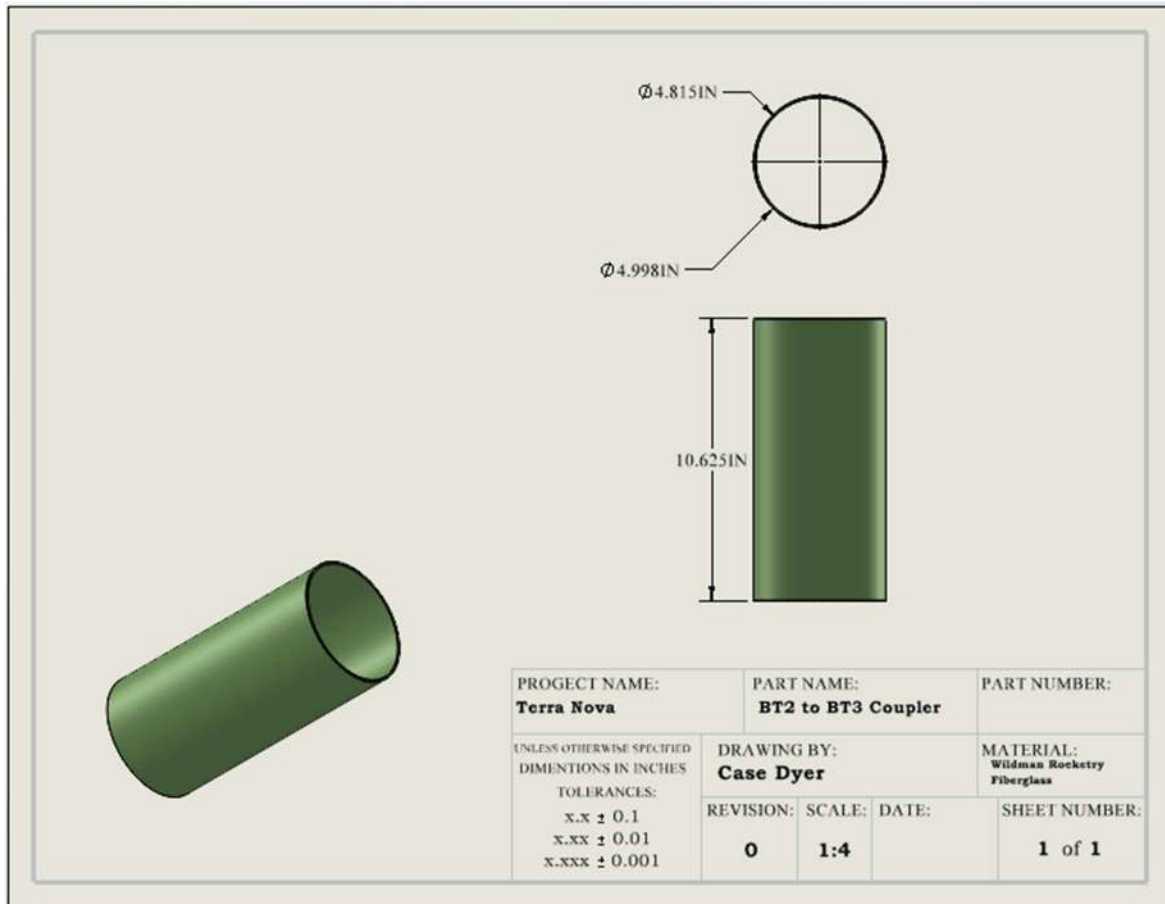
Body Tube 2 to Body Tube 3 Coupler
